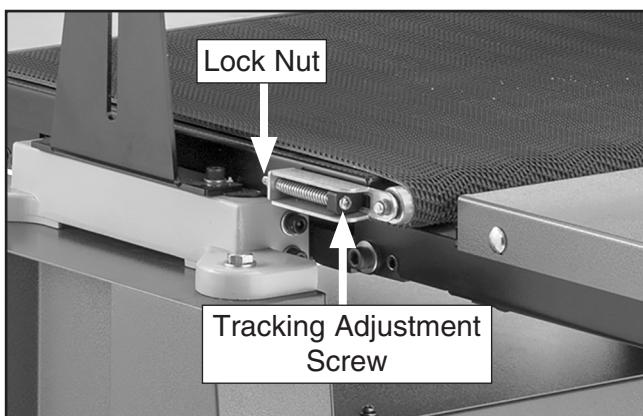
Conveyor belt tracking adjustment screw and lock nut.
